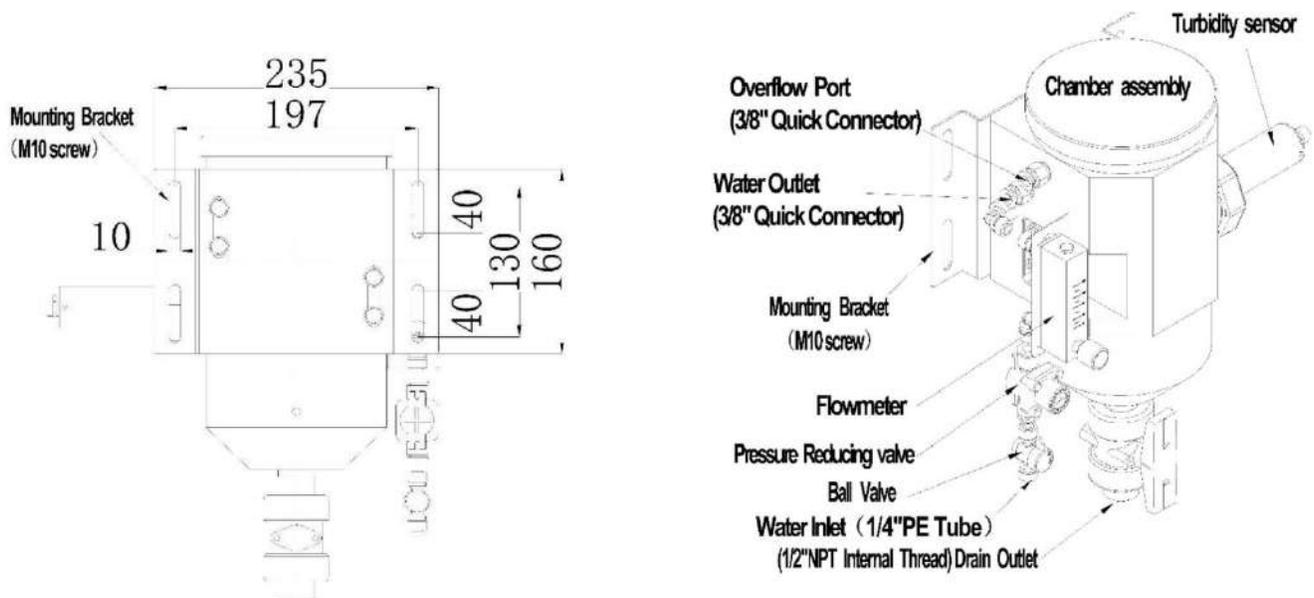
FR-100 Flow Reservoir Assembly Dimensions (mm) & Diagram
